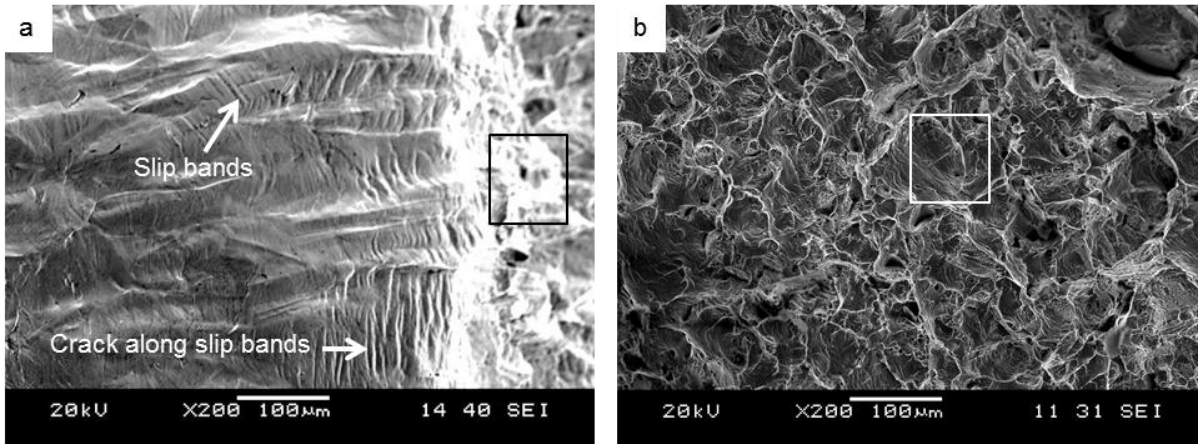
Fatigue fracture surface of specimen of Ni-22Cr-2Fe in HCl solution, at 3.62×10^3 cycles. (a) Indicates slip bands and partially fracture surface, (b) ductile fracture surface.
